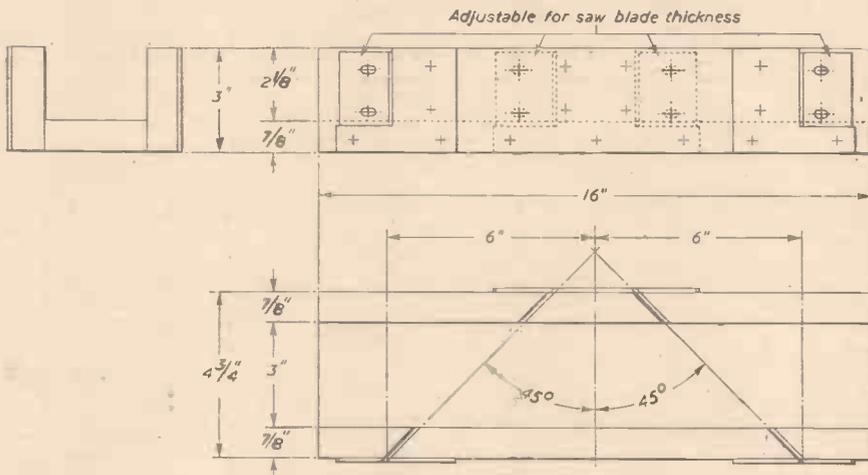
Front and end elevations and plan of a mitre block with adjustable metal fences.
